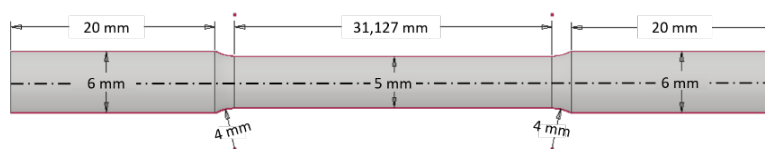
Dimension of the tensile test specimens based on DIN 50125 type A
